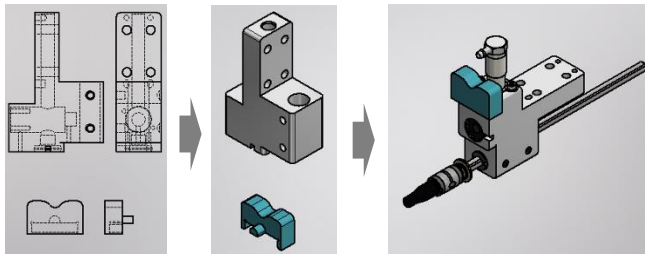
From left to right are the technical drawing reference, 3D drawing of mechanical parts and tools, and assembly drawing.
